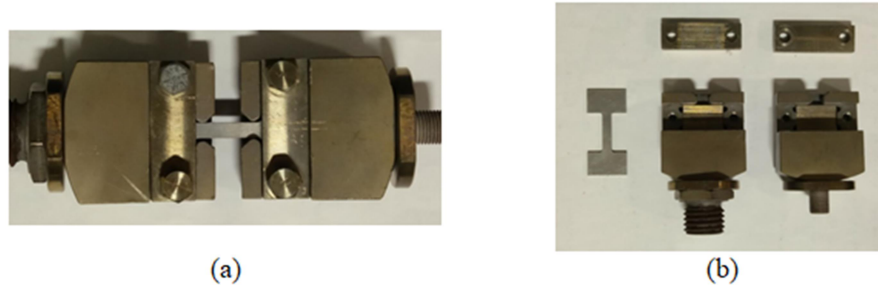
Grips utilized for tensile testing; (a) grips and tensile test sample assembly, and (b) disassembled grips and test sample.
